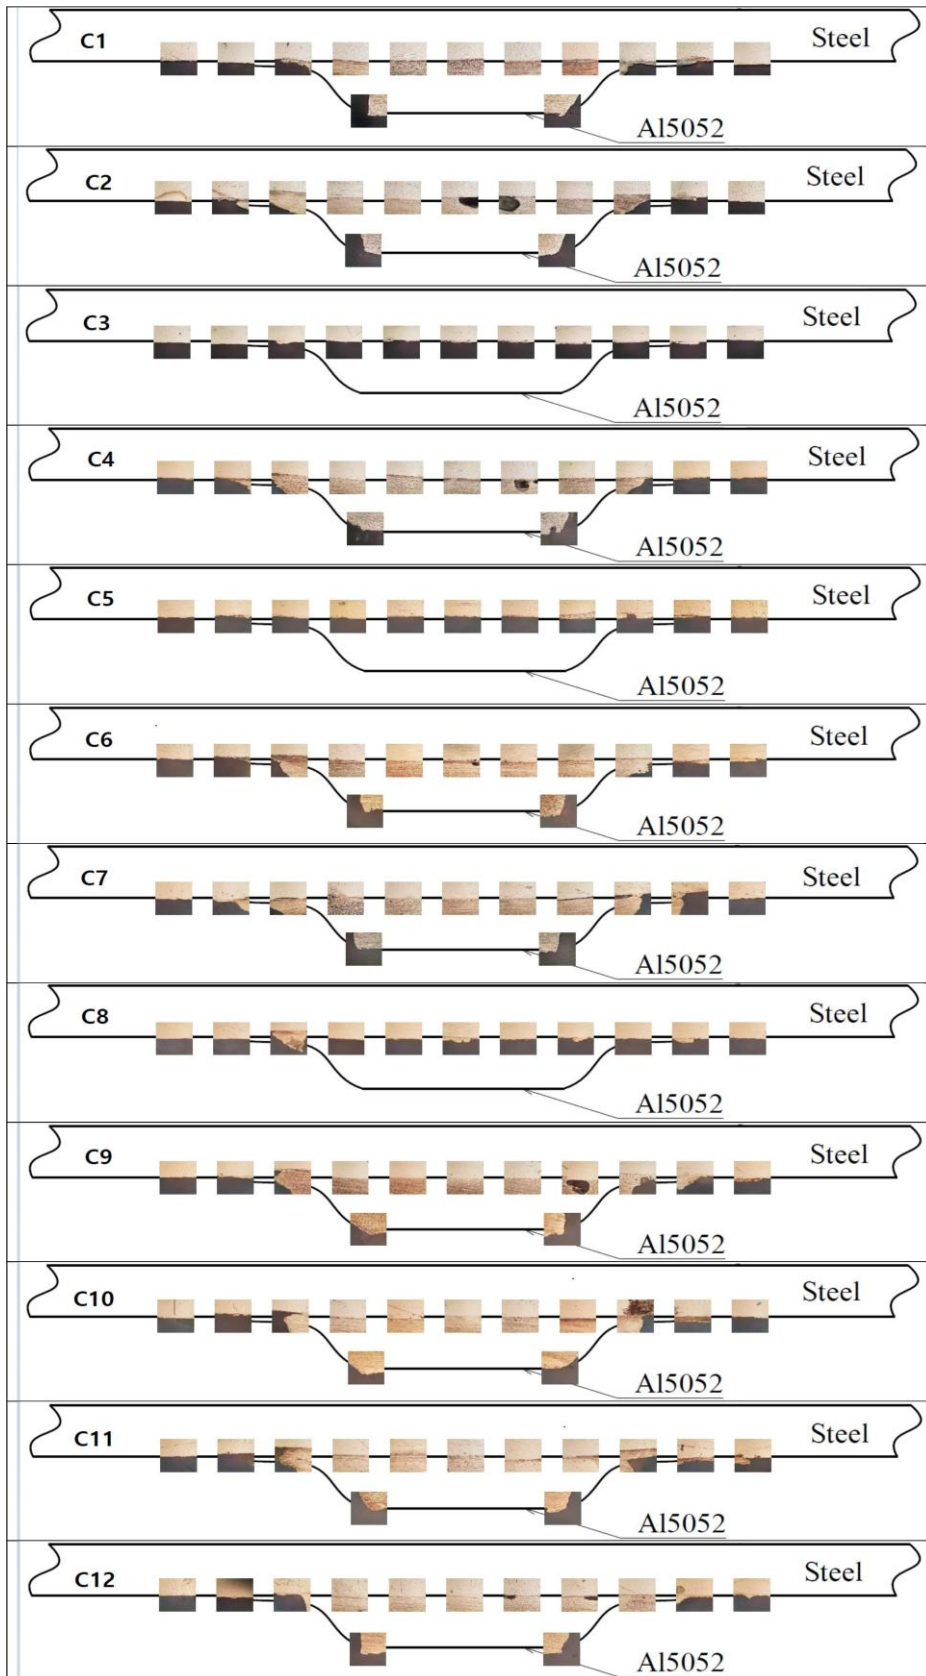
Figure arrangement of microscopic section of aluminum nuggets welded on steel plates(X400)
